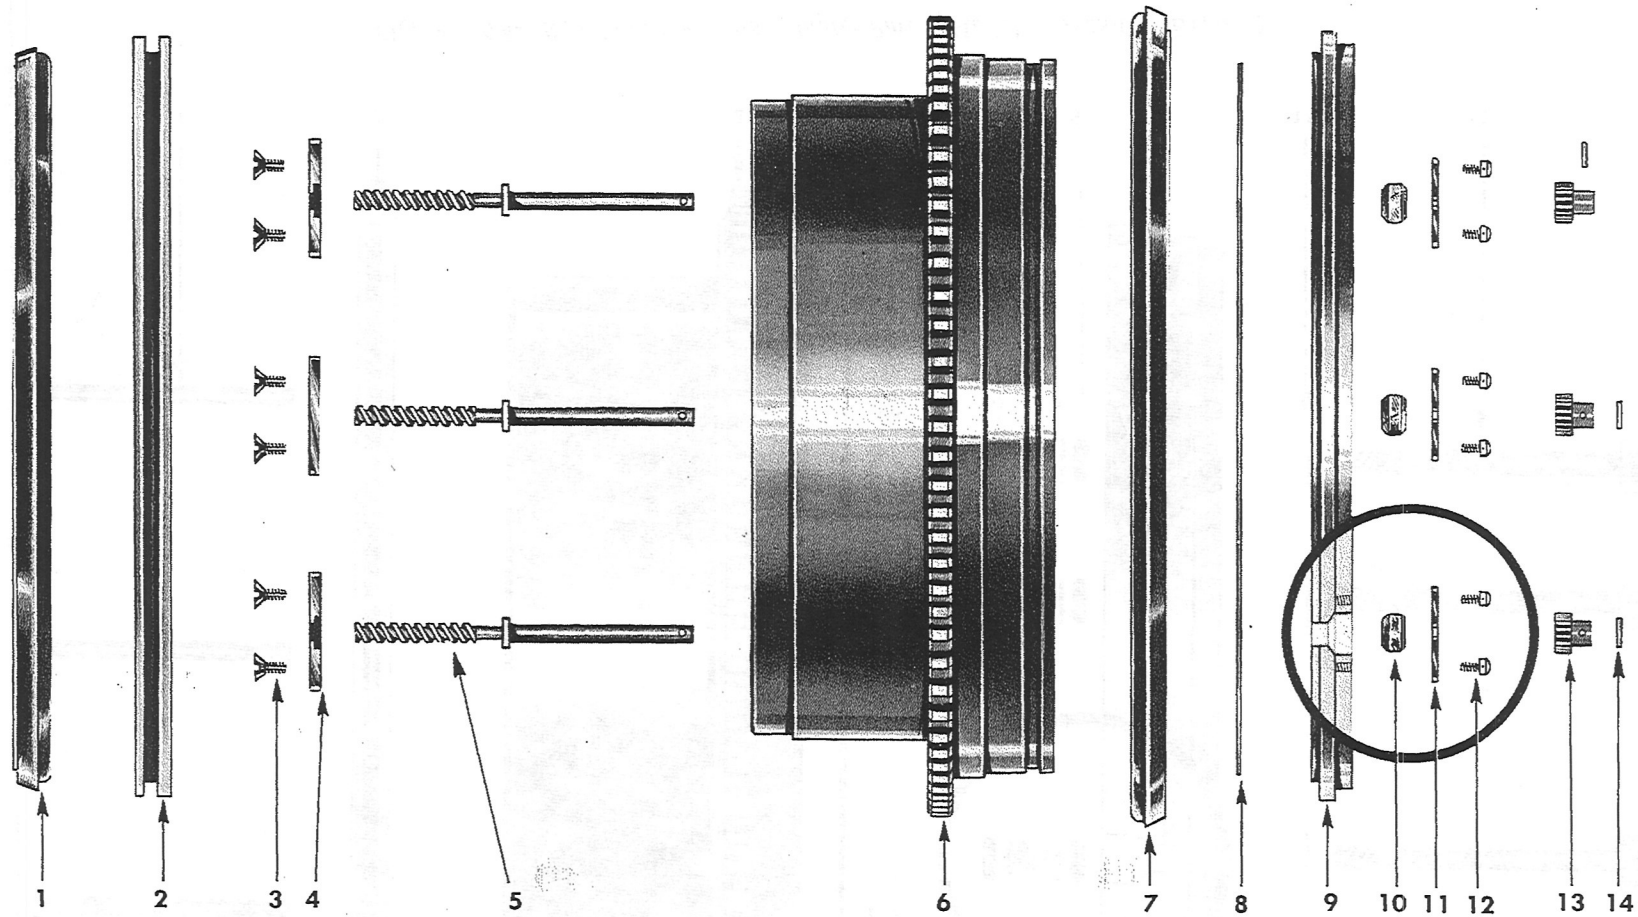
B—Regulator Gear and Adapter Parts (Models A632S-A1, -A2)
